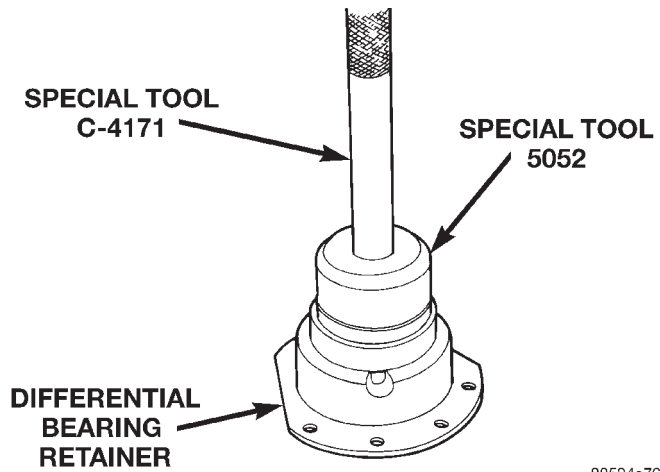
Position Bearing Cup Remover Tool in Retainer
